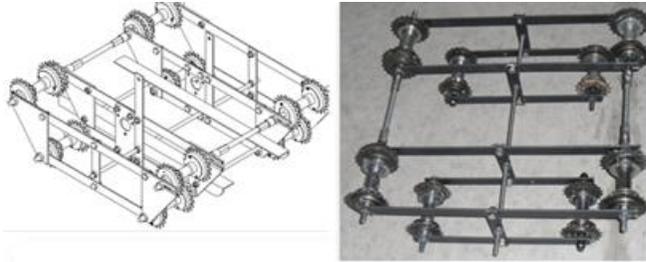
Skeleton-Wheels assemble with new designed or modified elements
